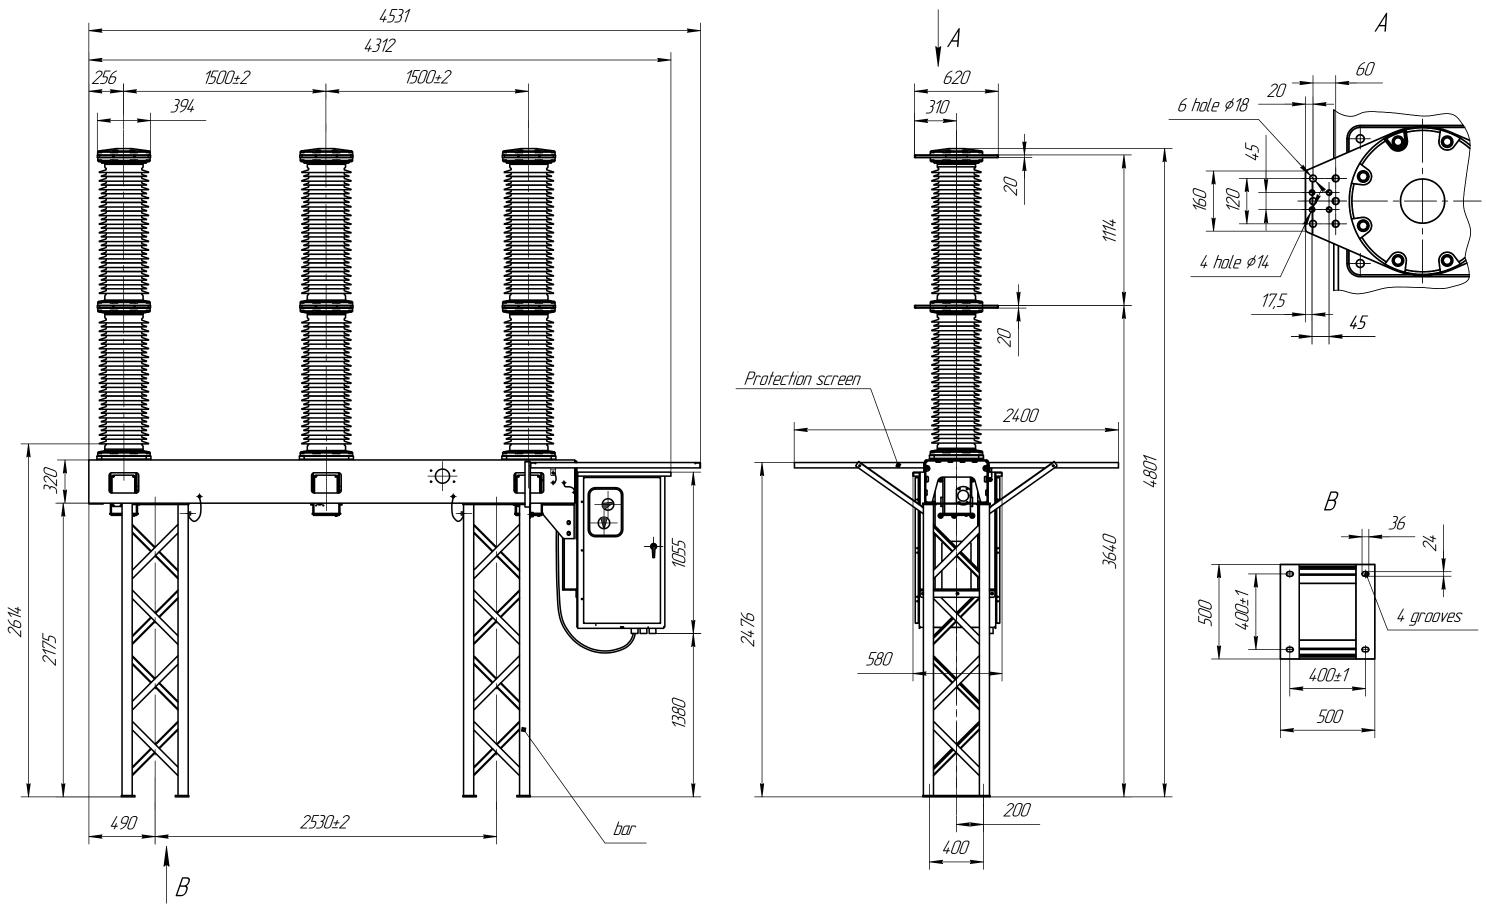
Overall, adjusting and adjoint dimensions of the vacuum circuit breakers tupe BPC–110 III–31,5/2500 YX/11
